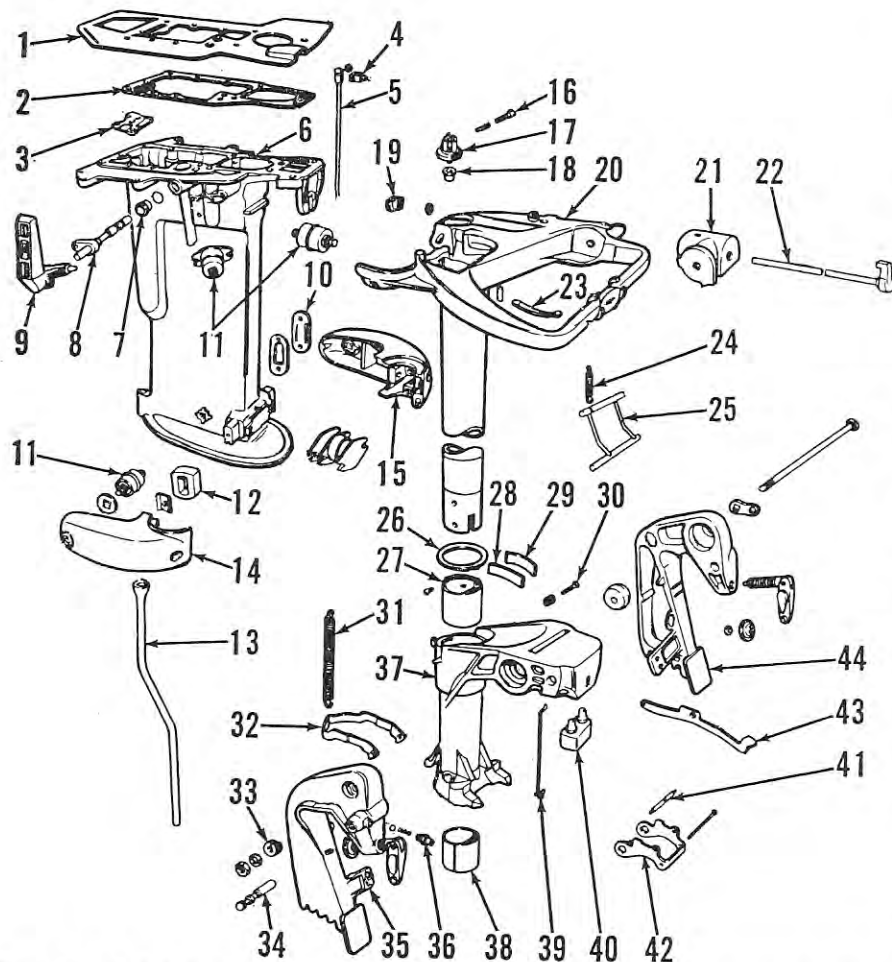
Exploded view of stern bracket, exhaust housing, drive shaft housing and associated parts used on late models. Early models are similar.
